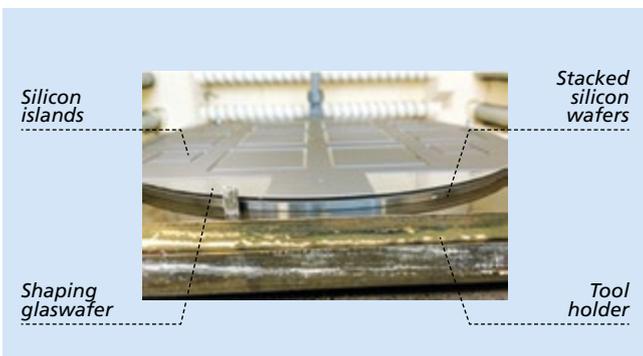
Wafer stack and vacuum tool forming a reusable mold, with glass wafer on top
